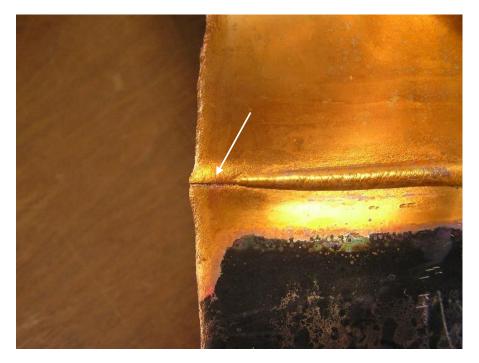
Small lack-of-fusion defect (arrowed) on longitudinal weld on internal wall of vessel (external weld cap was intact). (Image No. P1012801.jpg)
